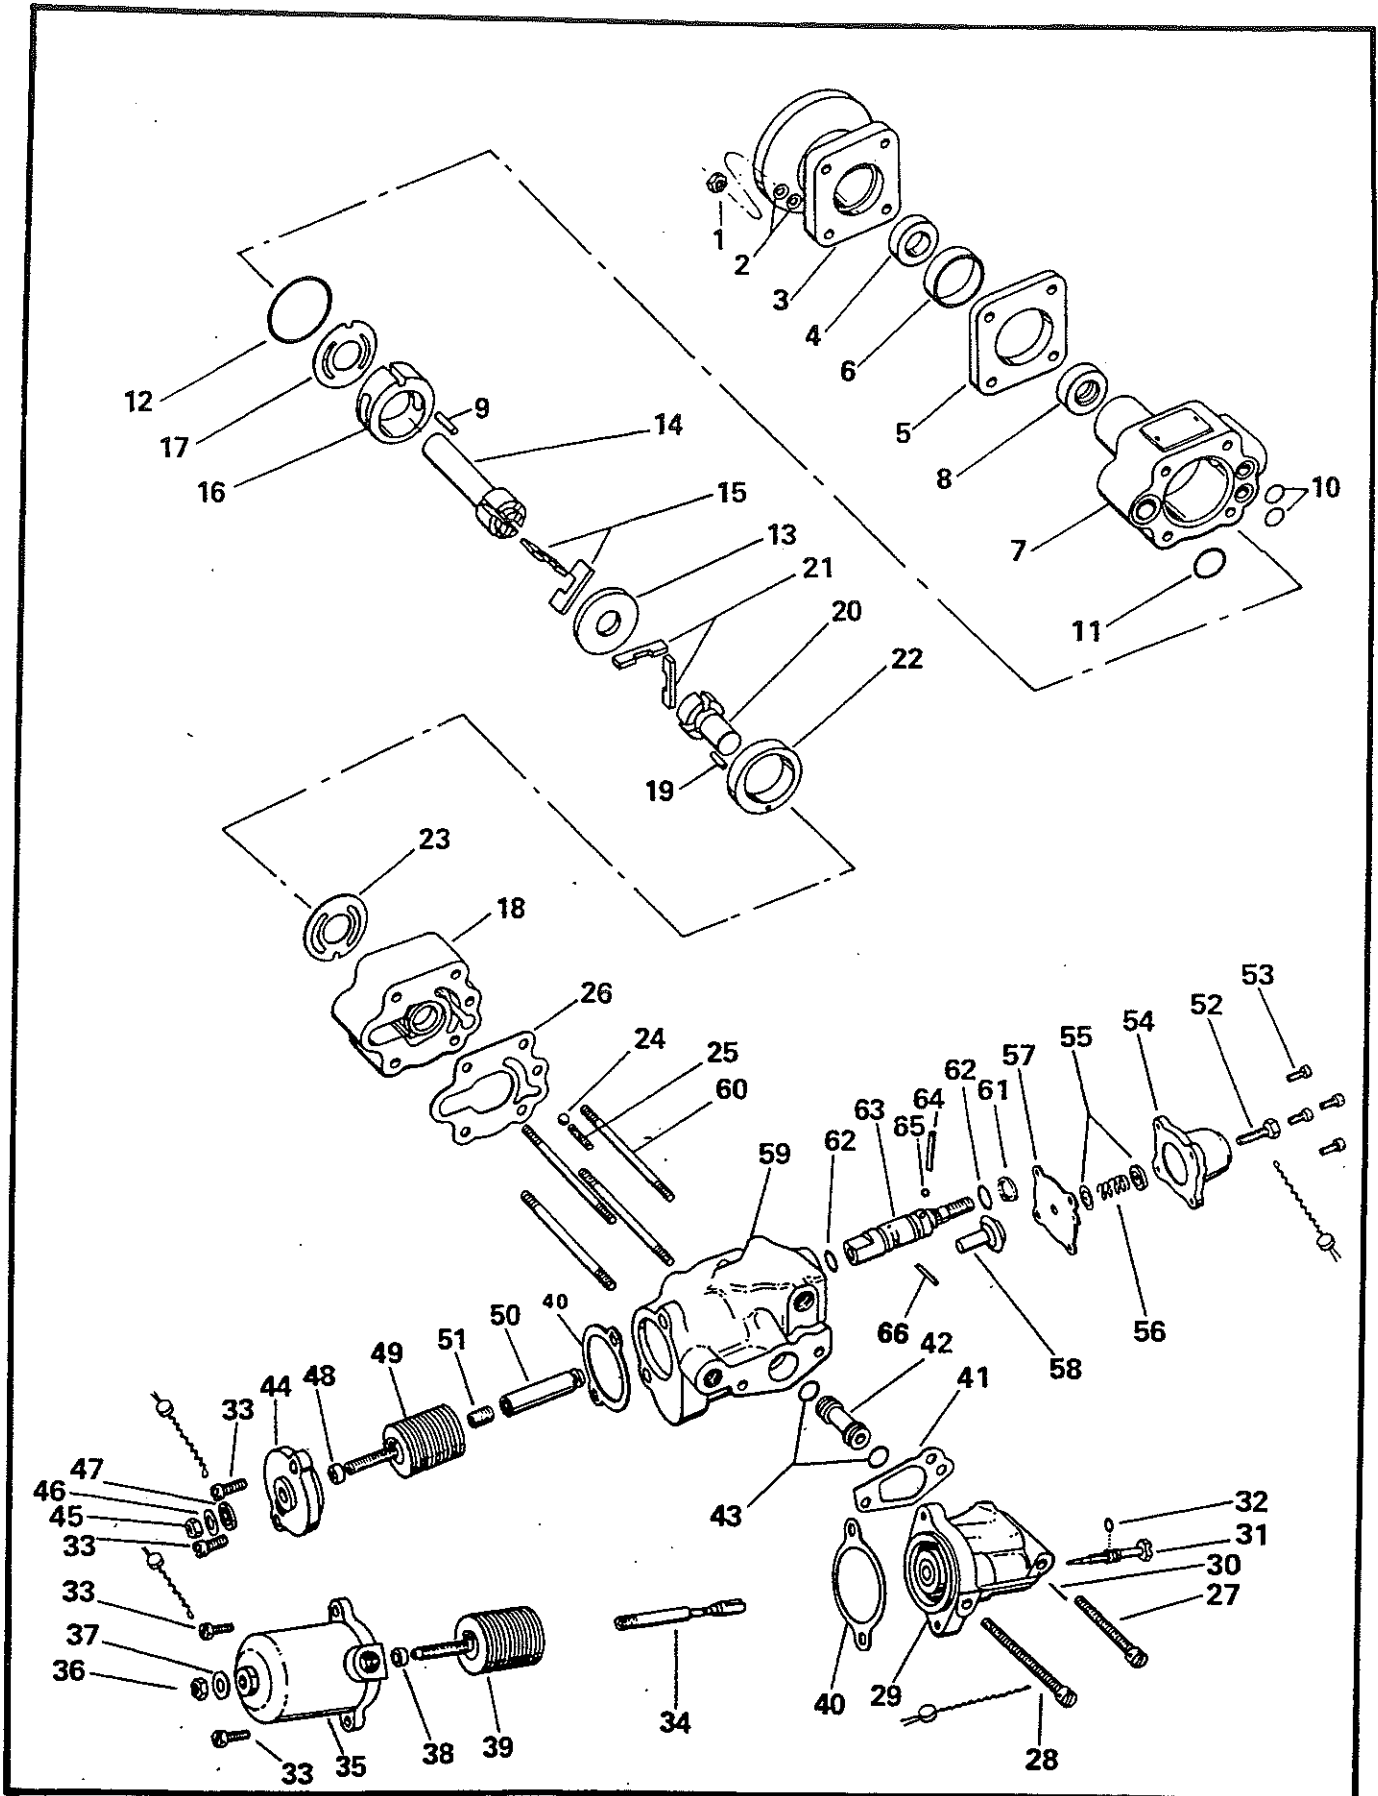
FUEL PUMP ASSEMBLY.
